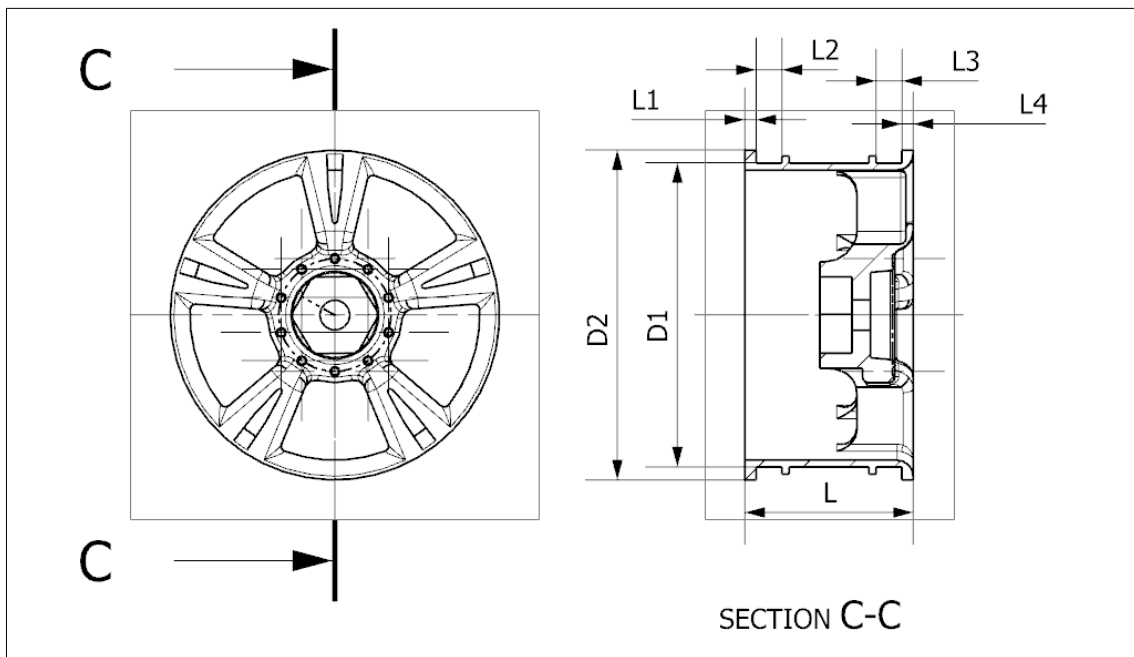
2D drawings of the wheel part with dimensional descriptions
